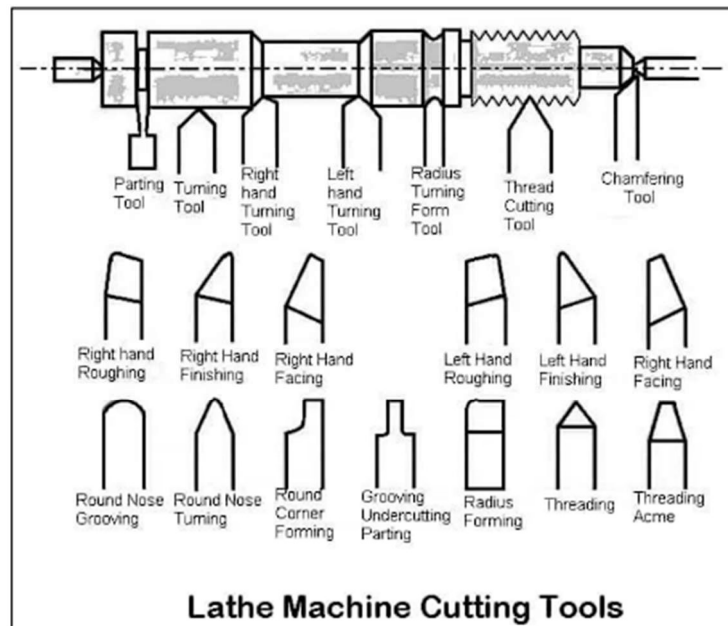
Types of tool bit for machining process (Sabhadiya, 2022)
